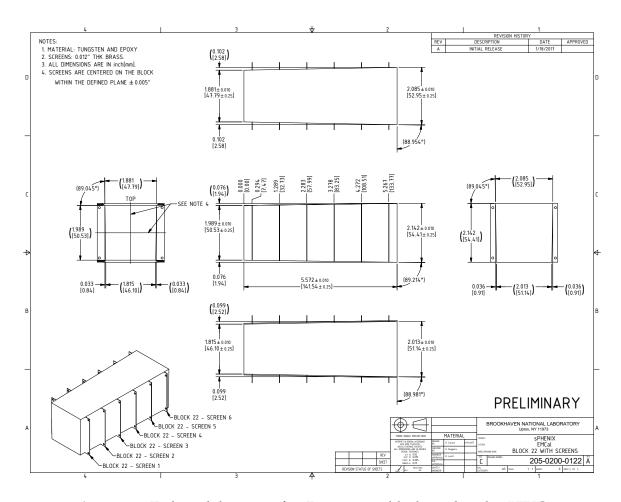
Technical drawing of a 2D projective block produced at UIUC.
